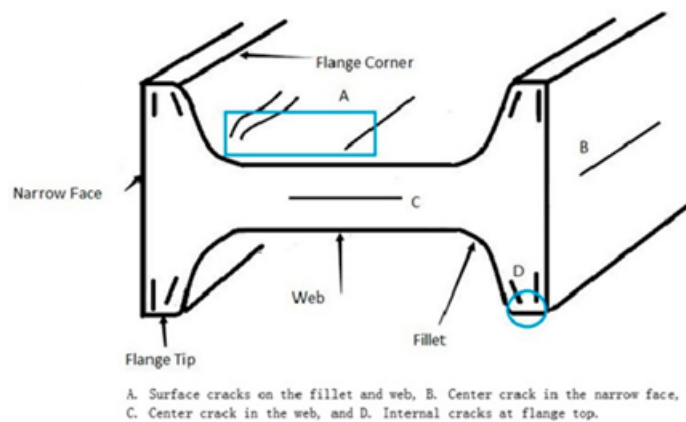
Different types of cracks in a beam blank section [Yang et al., 2018a]
